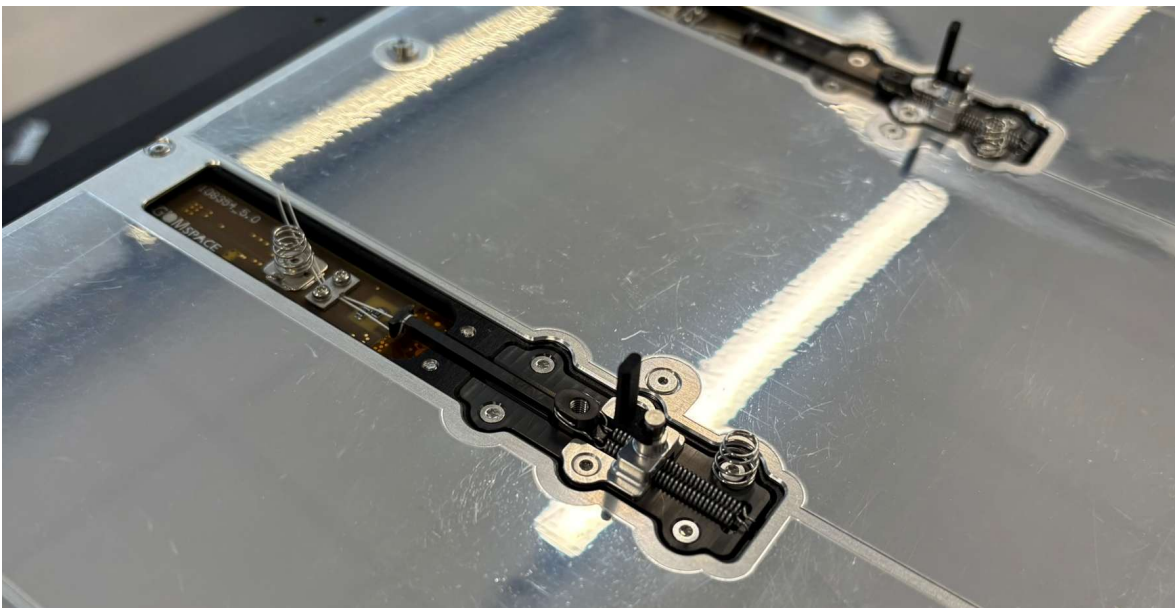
HDRM Bolt is unscrewed and Bolt tensioning spacer - MGSE Tool 01 installed.
